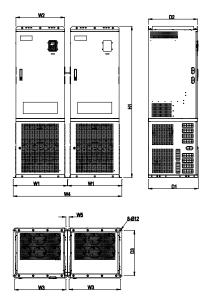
Parallel installation dimension for 380V 710–3000kW and 660V 800–3000kW models
